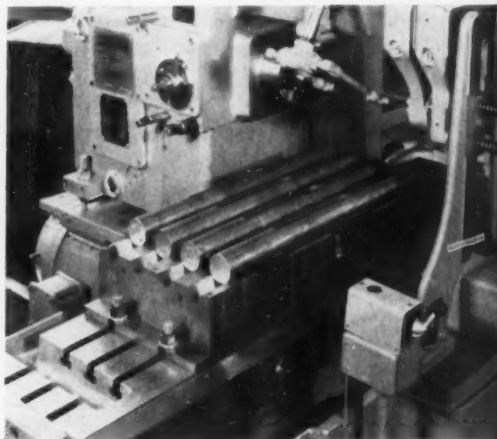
Close-up showing the keyway milling of various shafts on magnetic vee fixturing.
